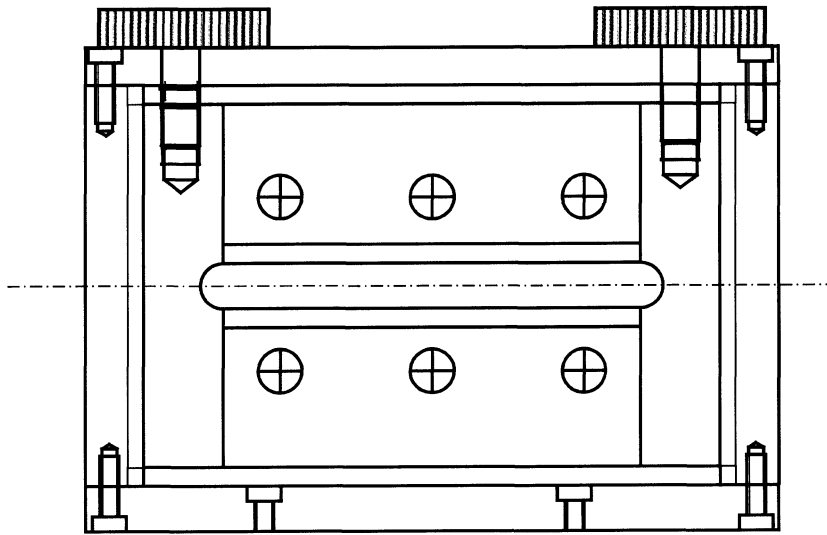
Schematic diagram of laser welding equipments
